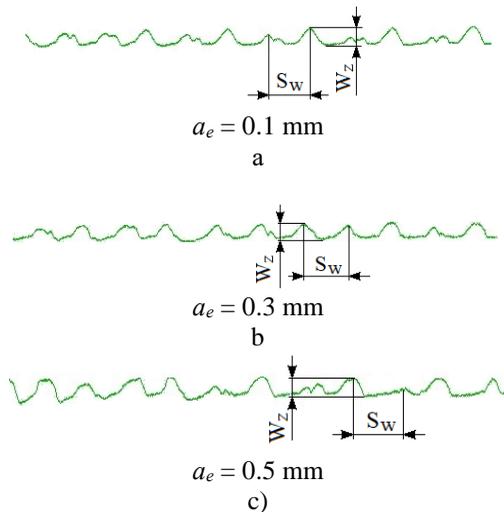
Profilograms of machined surfaces after up milling with different radial depth of cut
